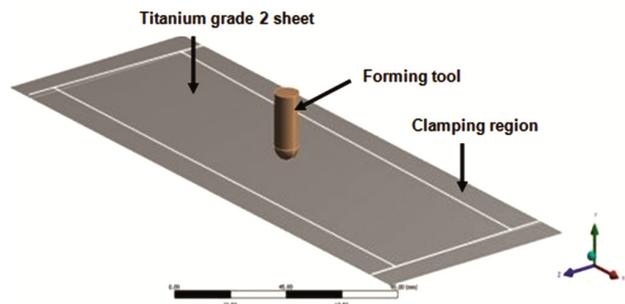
Assembly of sheet metal and forming tool geometry for finite element analysis.
